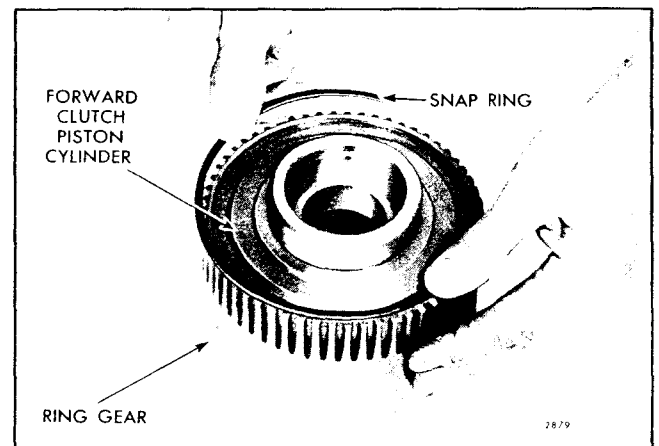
Installing Forward Clutch Piston Cylinder Snap Ring in Ring Gear
